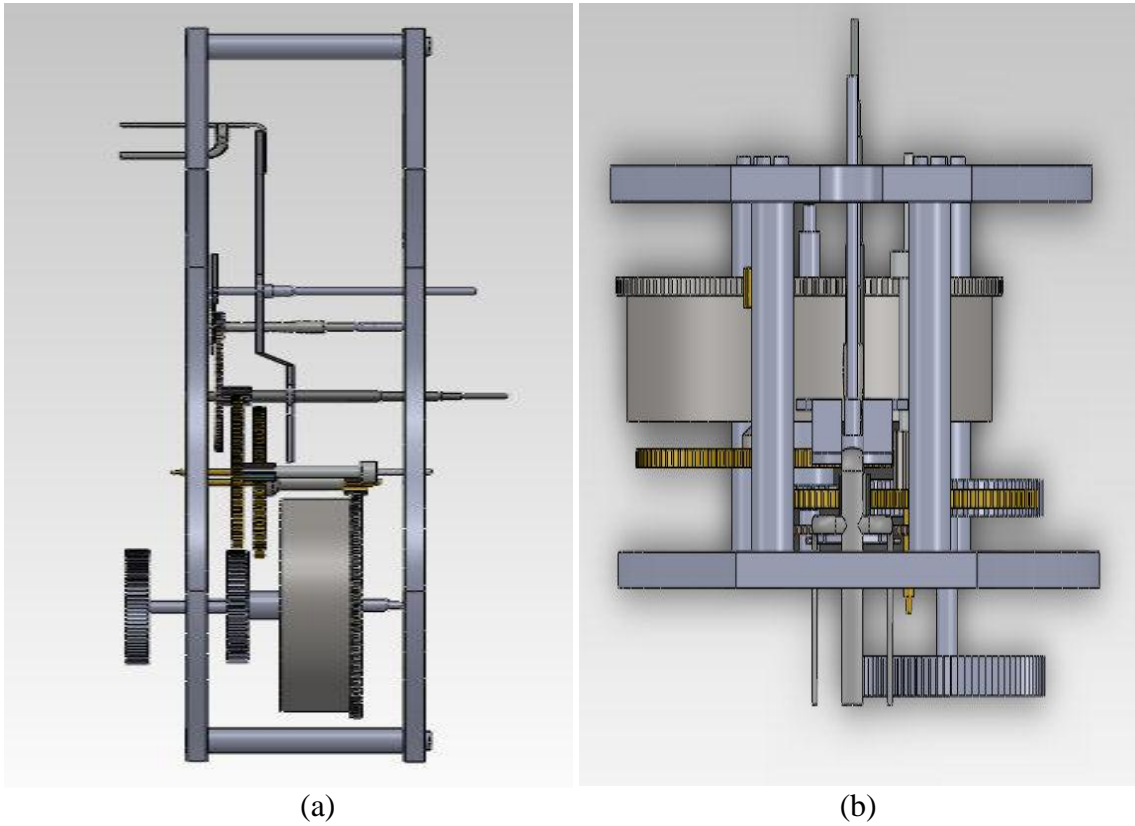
Atmos clock gear train model with (a) side, and (b) top views in Solidworks
